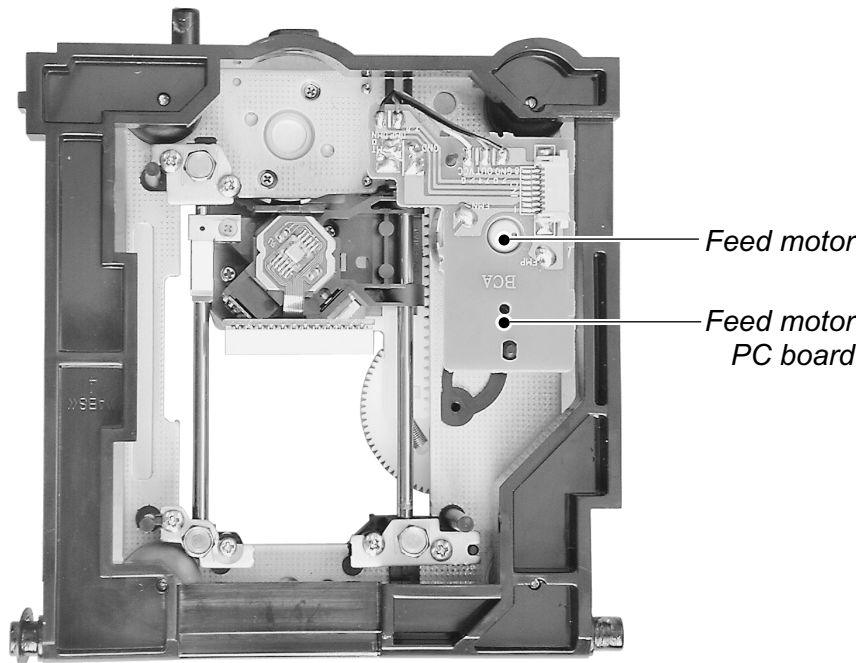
Mechanism chassis assembly (Bottom side)
